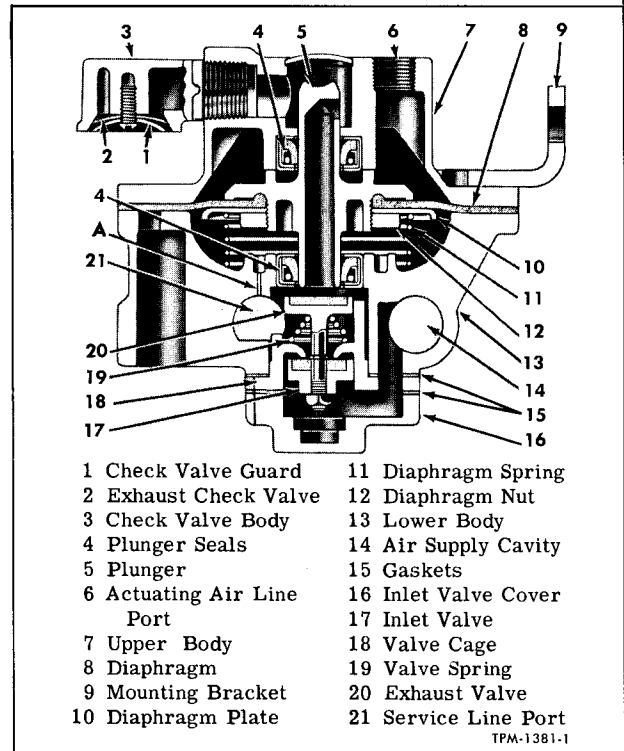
Rear Brake Relay Valve (Midland-Ross)
